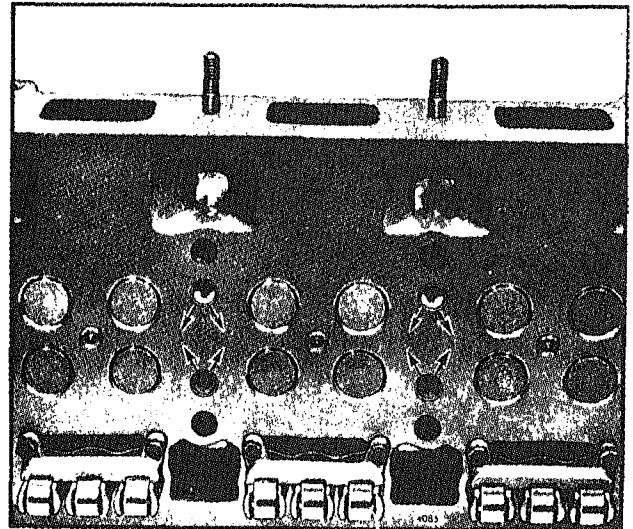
Correct Installation of Water Nozzles in Four-Valve Cylinder Head
